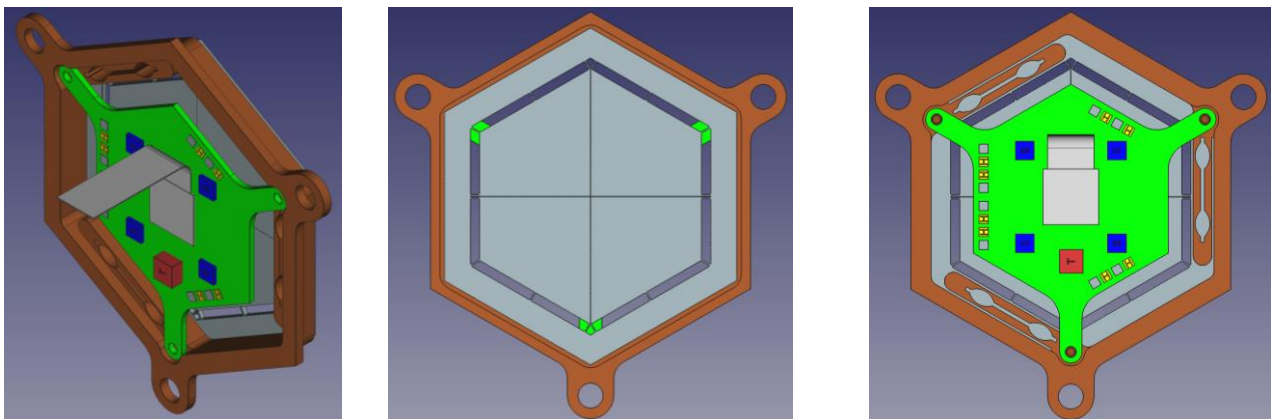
The CryoAC cold assembly: it is shown the chip (it is grey and glued on 3 points onto the leafspring), the CFEE (green), and the mechanics (brown).
